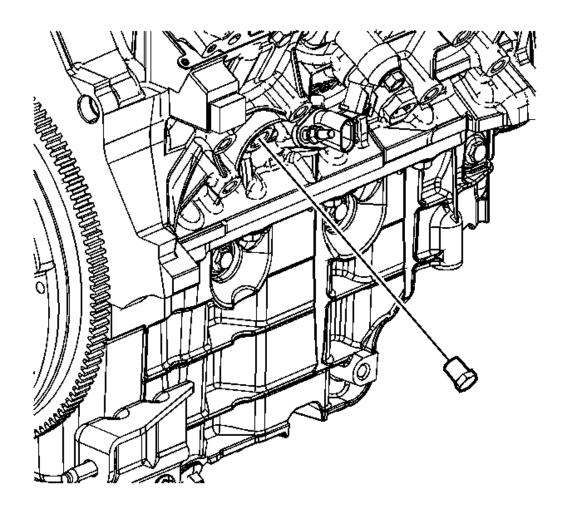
Identifying Right Side Coolant Drain Plug Courtesy of GENERAL MOTORS CORP.
